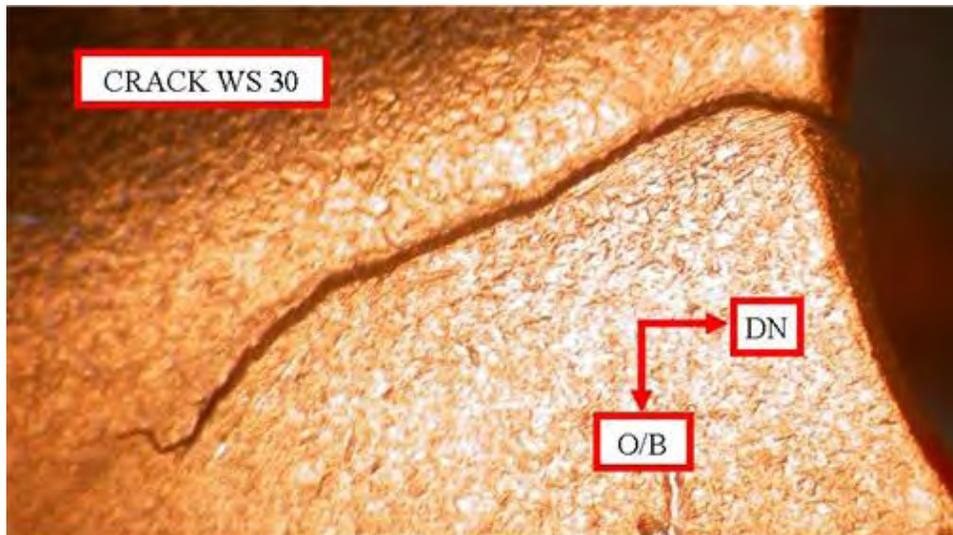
Location of Crack on the Left Wing Aft Main Gear Door Hinge Bracket WS 30
